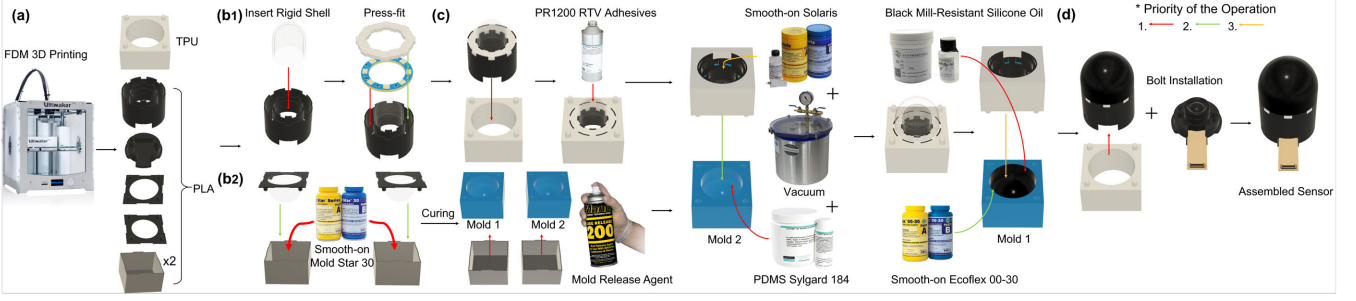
Fabrication Procedure of R-Tac0 Sensor. Five main steps are depicted: (a) 3D printing the required parts. (b1) Fabricating and assembling the illumination system. (b2) Casting the molds. (c) Casting the contact module using two-piece molding technique. (d) Installing the camera and sensor shell.
